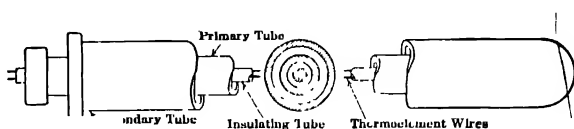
Engelhard Rare-metal Thermocouple with Protecting Tubes.
